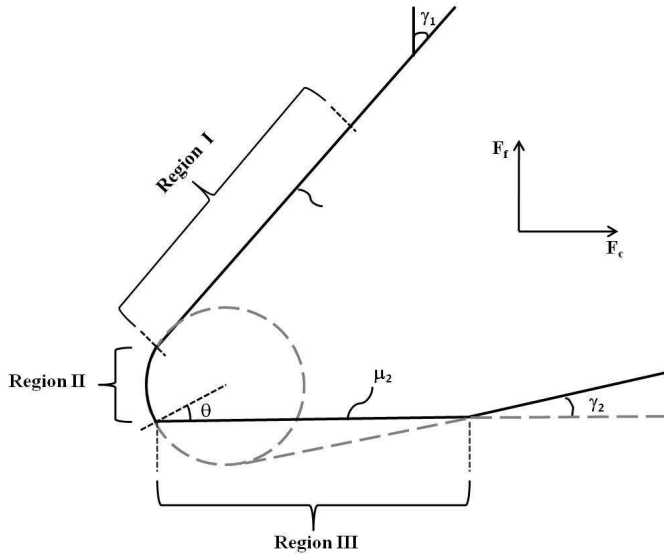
Illustration of the three regions of cutting edge of a tool in the presence of flank wear
